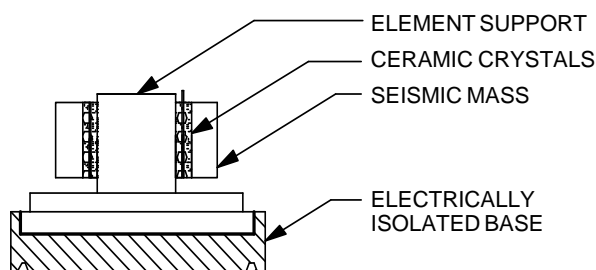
Representative cross section, 3221C element assembly. (Refer to outline/Installation drawing 127-3221C provided with this operating guide for a detailed outline representation of Model 3221C).
